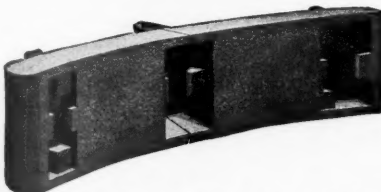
Pocket-Face of Interlocking Brake-Shoe.
